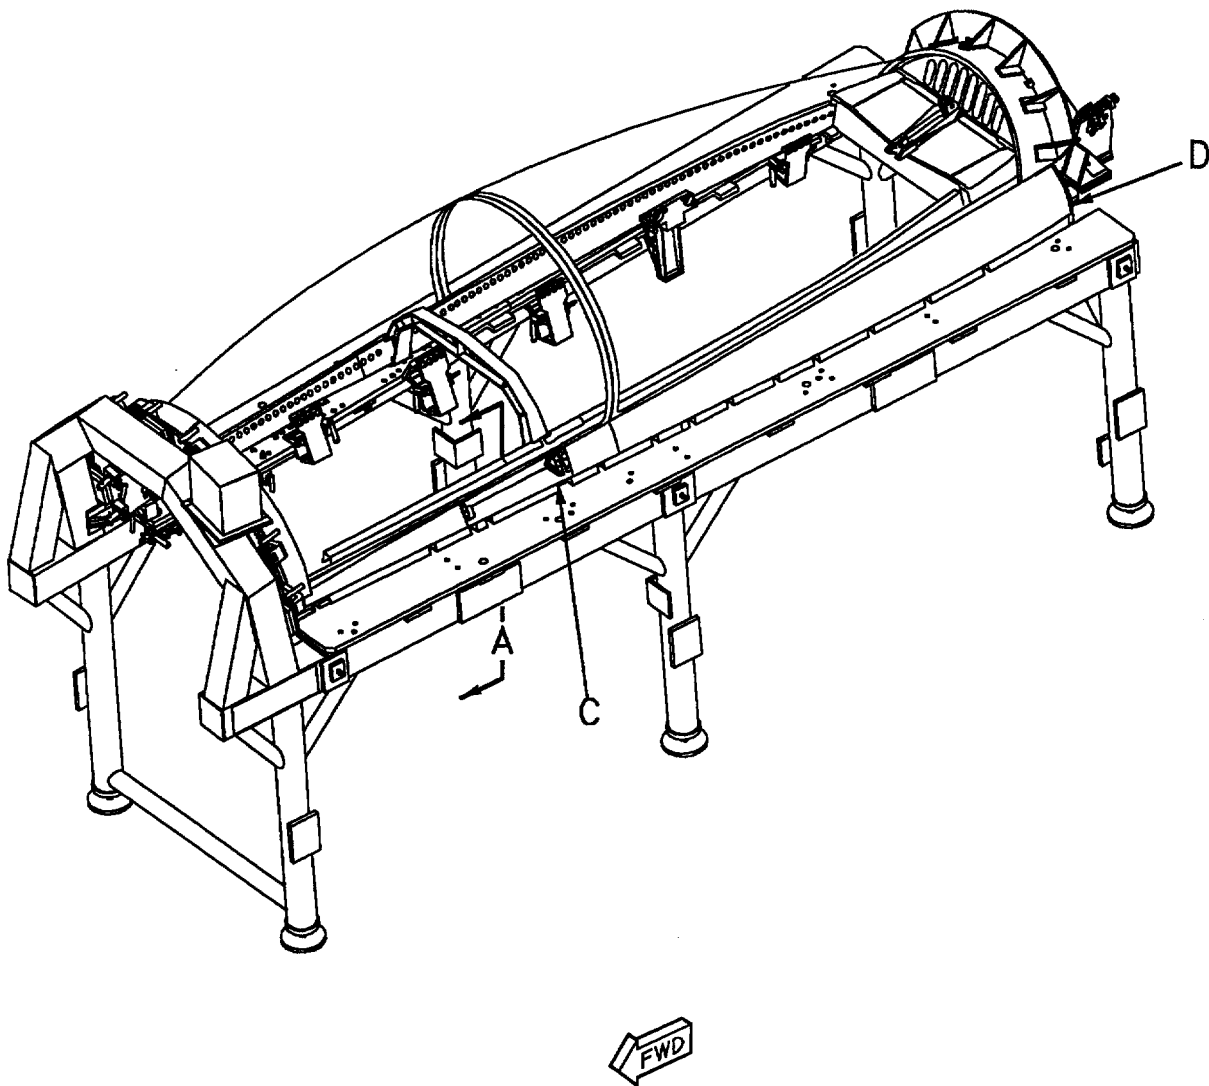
Inspection and Replacement - Seal Retainer (Sheet 1)
